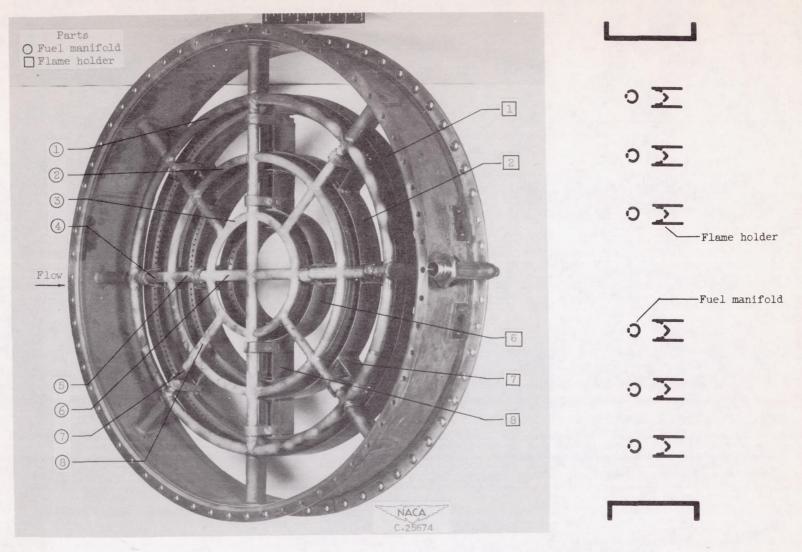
Schematic drawing of typical tail-pipe-burner assembly.
